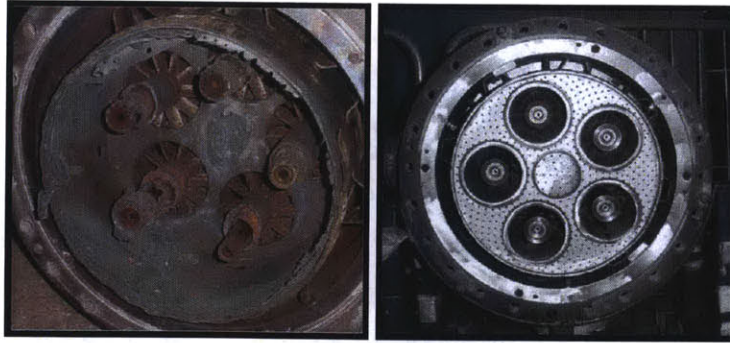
(a) Burner assembly damaged by combustion instability, (b) New burner assembly.
